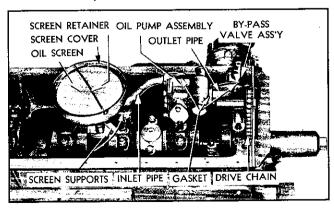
Three and Four Cylinder Lubricating Oil Pump Mounting.
